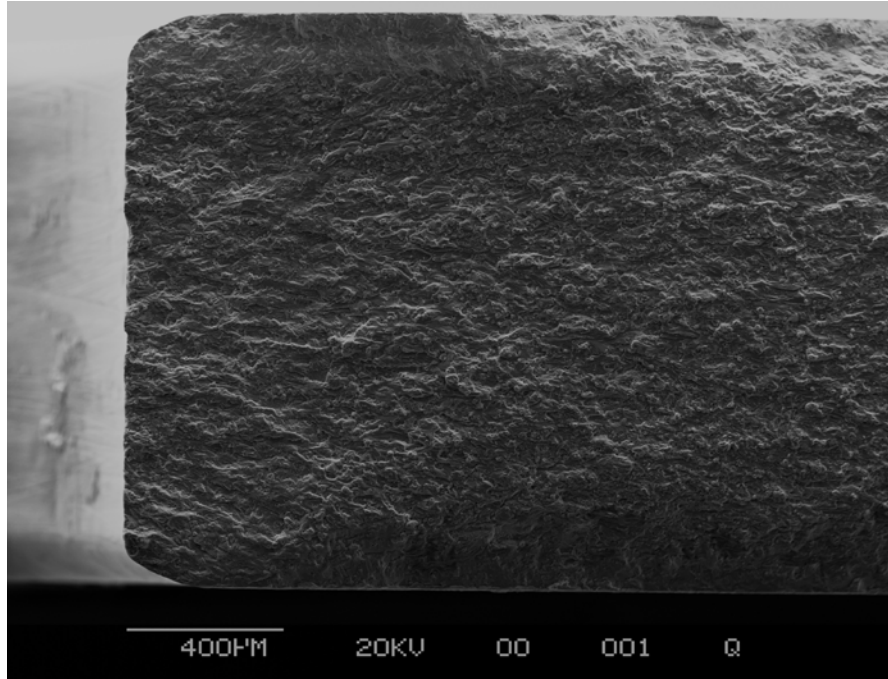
Fracture surface of specimen 17s showing crack initiation area
